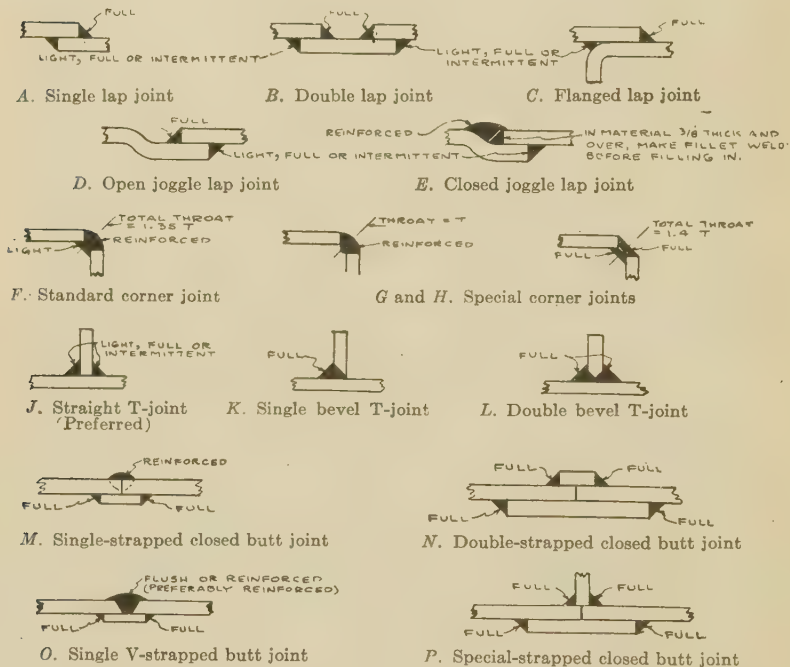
Welds in various forms of arc-welded joints.
